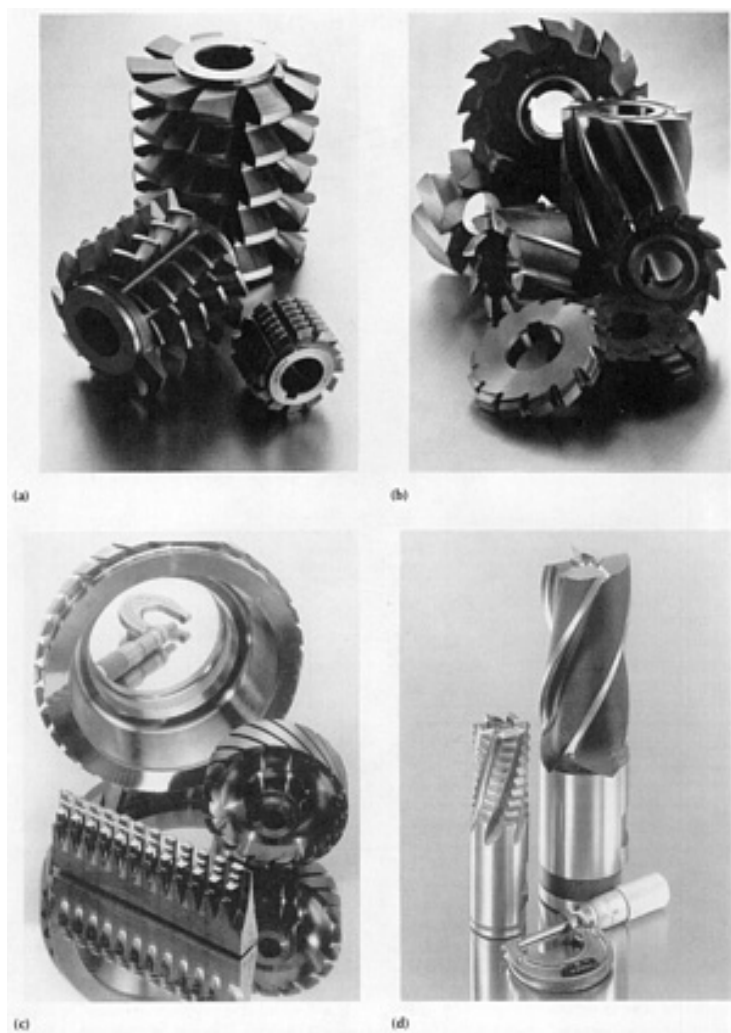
Examples of PM high-speed steel cutting tool applications. (a) Gear cutting hobs. (b) Milling cutters. (c) Broaches. (d) End mills
